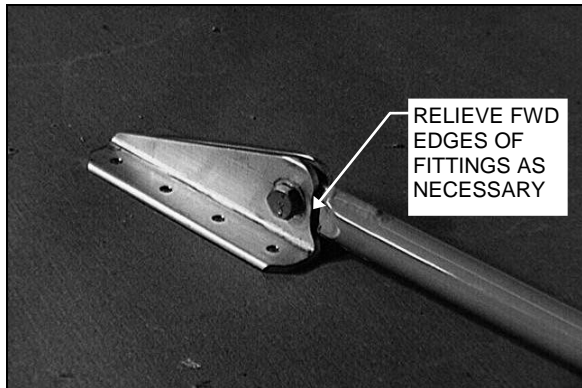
Mounting the Shell Attach Fittings on the Fuselage Strut
